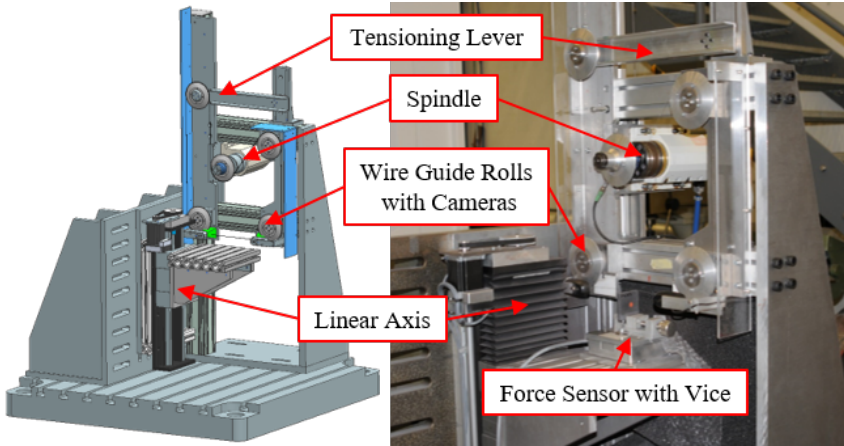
CAD model and photo of the wire sawing test rig with indication of the most important components.
